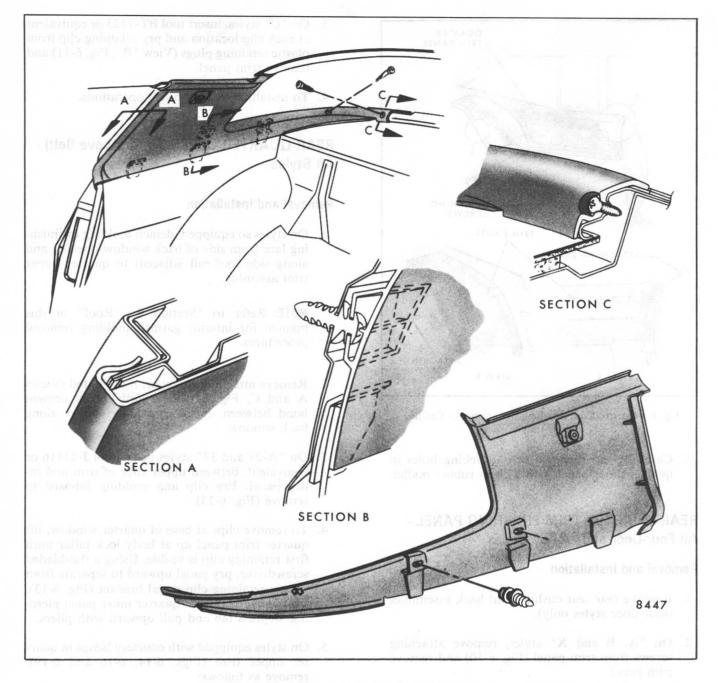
Rear Quarter Trim Attachment - "F" Styles
